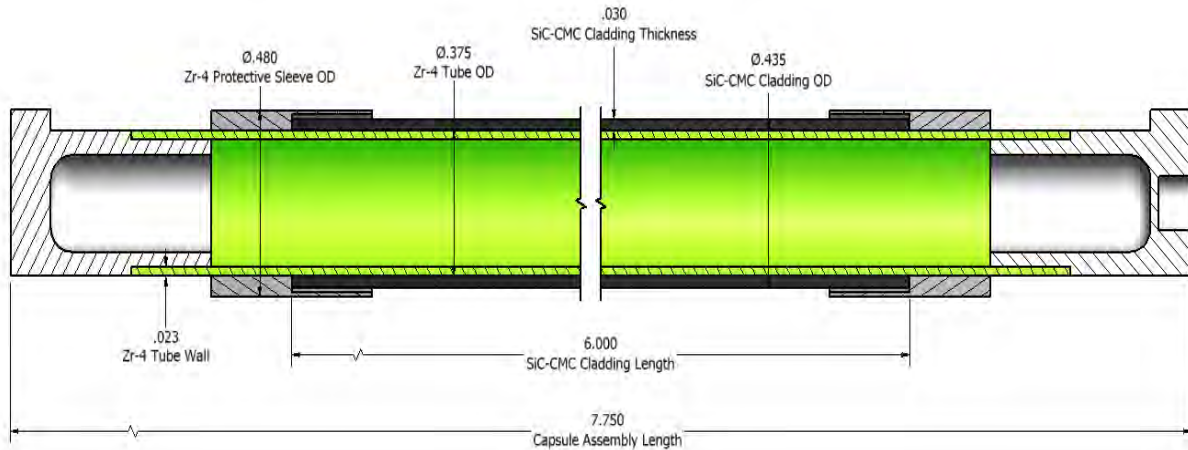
Geometry of the LWRs capsule assembly design for the Si-CMC hybrid Zr-4 cladding rodlet.³
